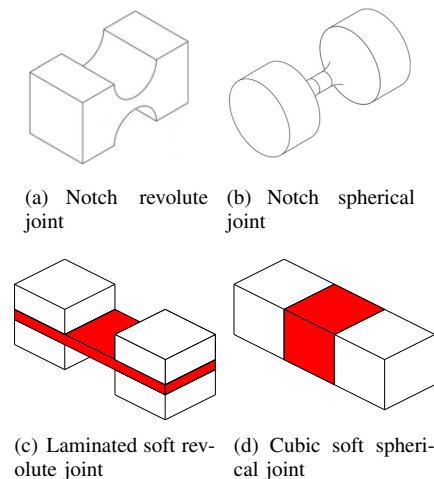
Examples of compliant joints and their soft joint counterparts (the red parts represent soft materials).
